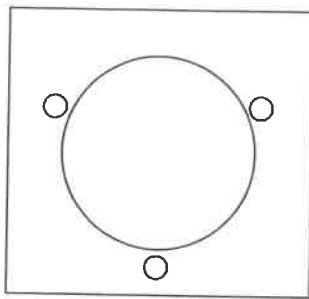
The Adapter plate and chuck with the same orientation for the machining
